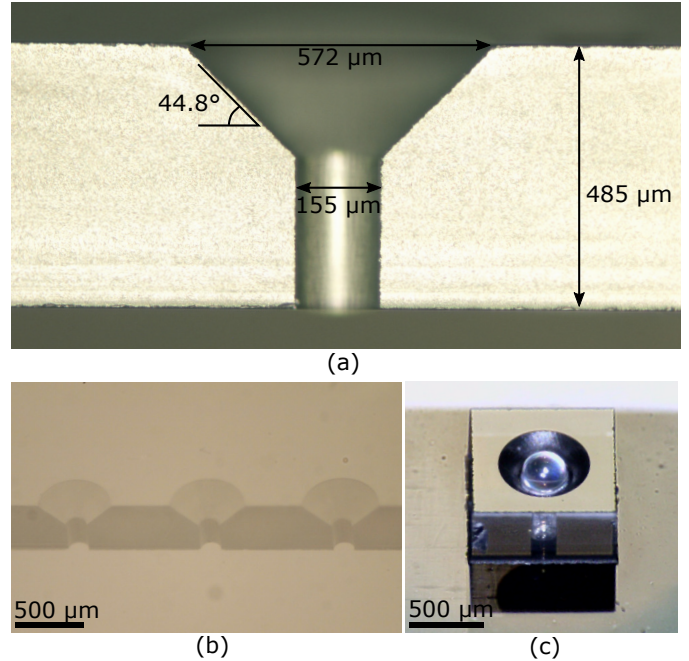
Fabricated ball lens holders in fused silica: (a) Microscopic view on a ball lens holder after cross-sectioning through the centerline; (b) Macroscopic view (after cross-sectioning) on 3 fabricated holder test structures fabricated at different z-coordinates; (c) Macroscopic view on a 300  $\mu\text{m}$  ball lens glued inside a holder.
